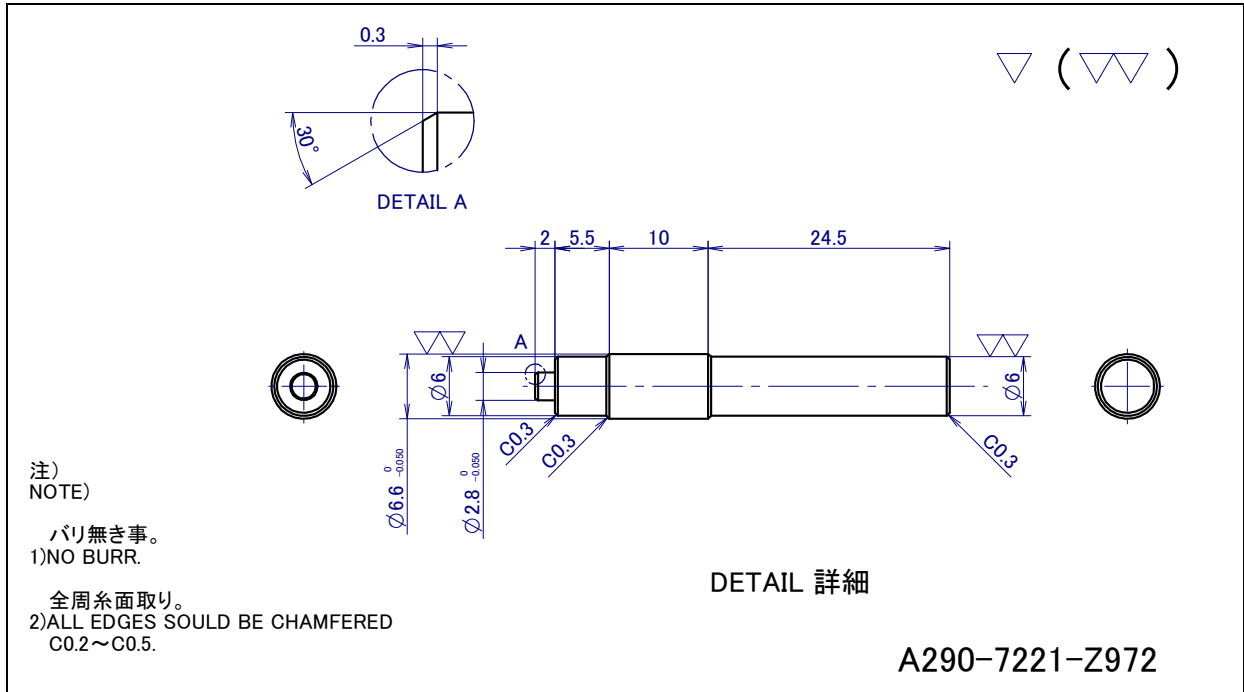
(g) Mounting fixture for J3-axis motor
